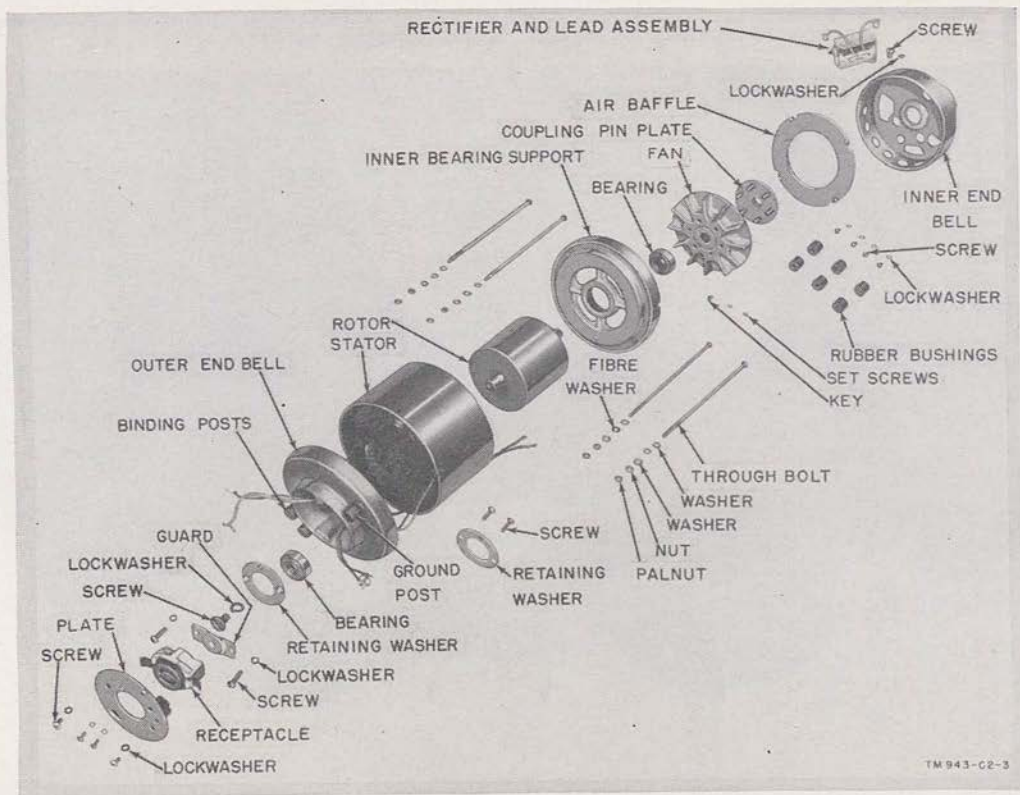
(Added). Generator GN-51-D, exploded view.
